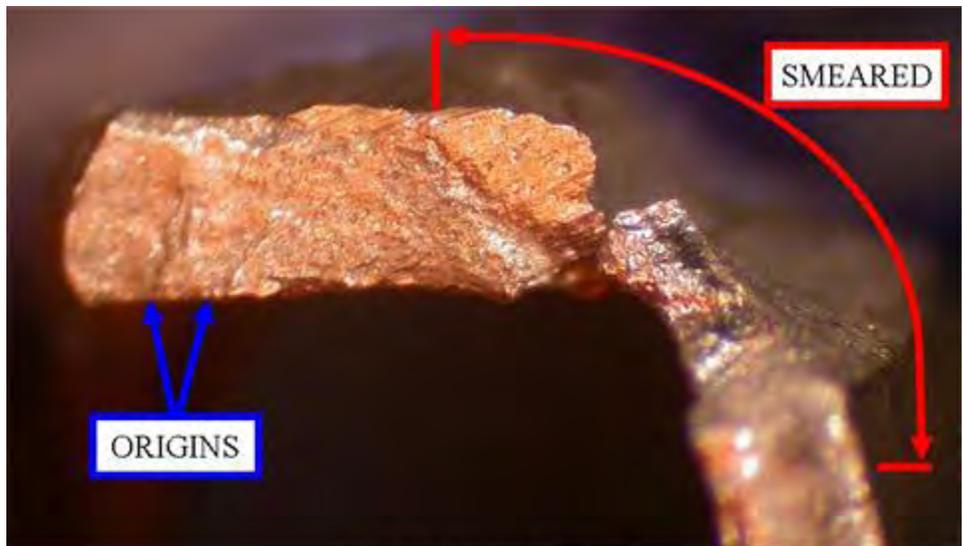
Macroscopic View of Crack 1 on the Left Wing Main Gear Door Angle WS 32
